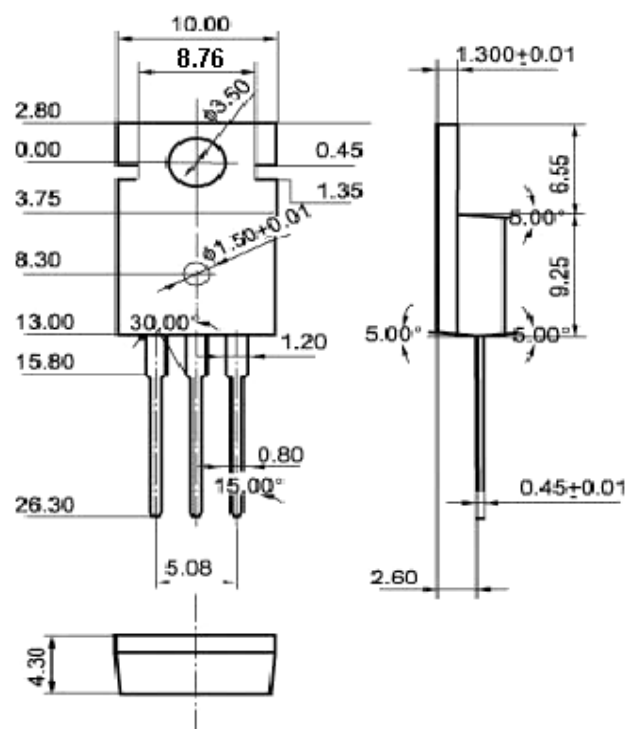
outline dimensions (unindicated tolerance: ±0.10 mm)
